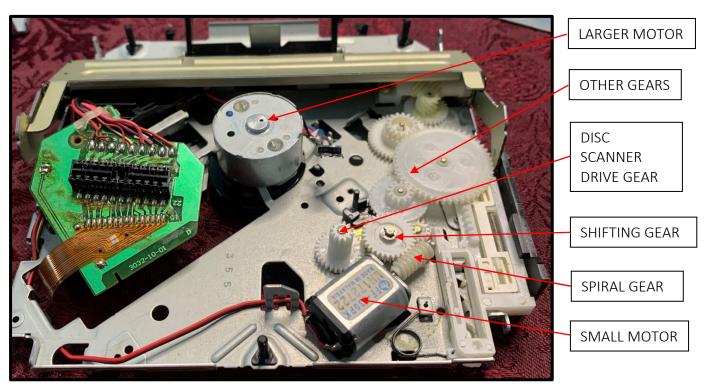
CD assembly containing set of gears (right side), larger motor (closer to top middle), small motor (bottom right), and the spiral gear (on the small motor).
